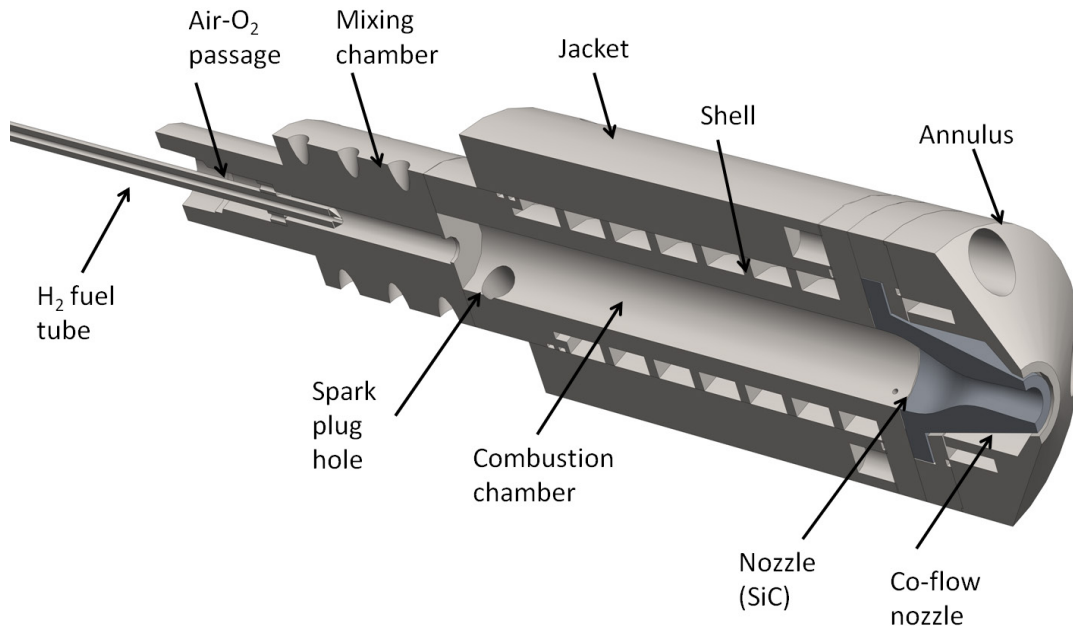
Schematic drawing of the laboratory-scale burner. Flow is left to right
